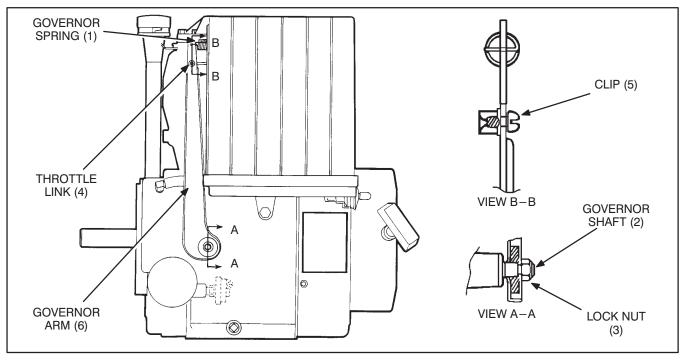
ENGINE GOVERNOR ADJUSTMENTS
